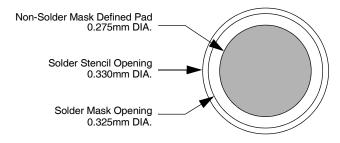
Recommended Non-Solder Mask Defined Pad Illustration
